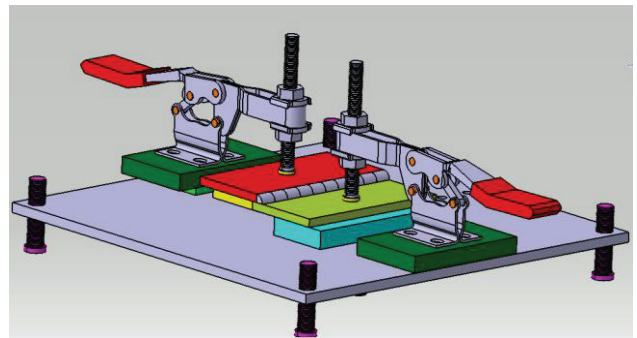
Designed Welding Fixture: Lap Joint
